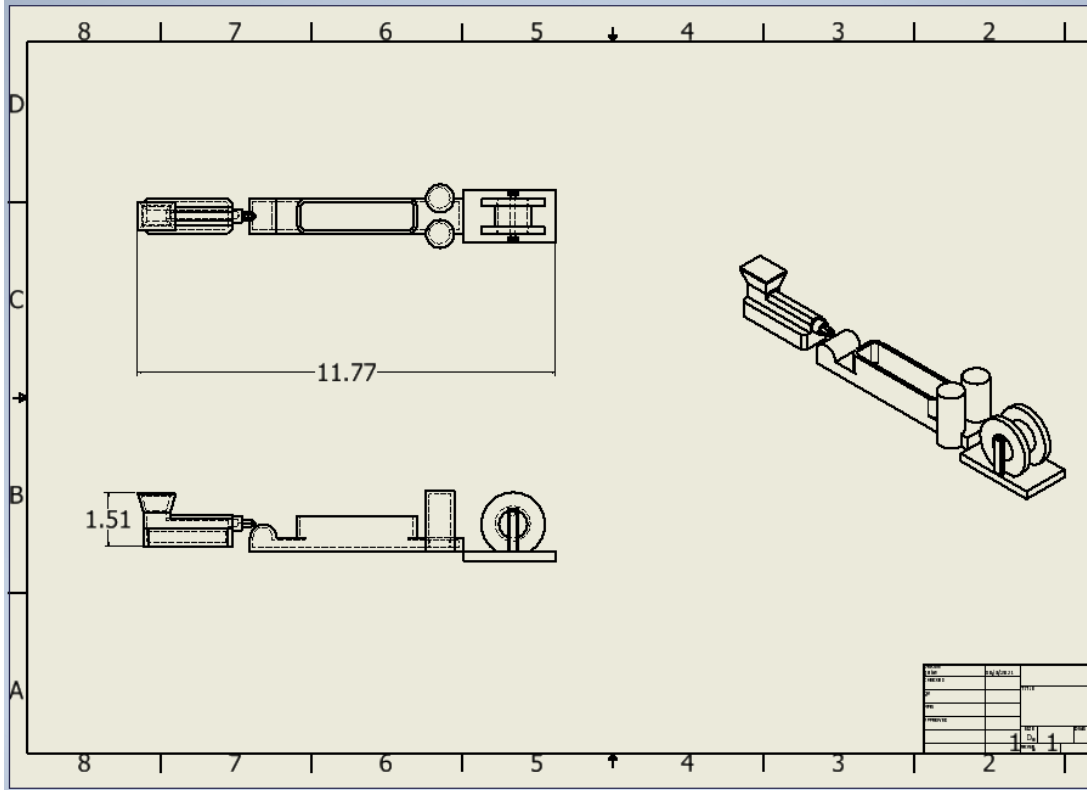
Mechanical Sketch - Extruder w/ Cooling Tank and Spooler
